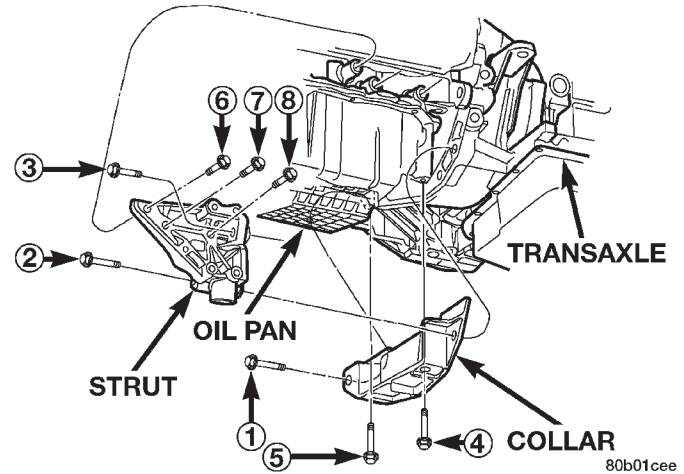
Structural Collar and Bending Strut—Removal and Installation
